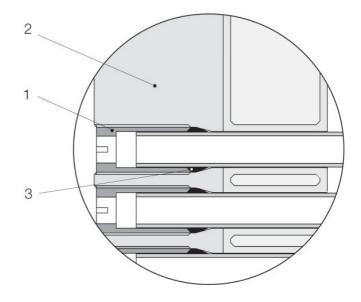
QVF Single tube seal with screw connection (1), tube plate (2), clamp ring seal (3)
